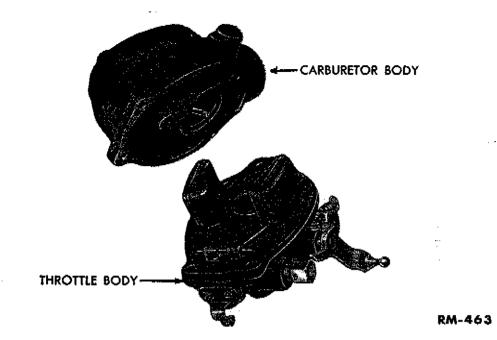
Assembling Carburetor Body to Carburetor Throttle Body
